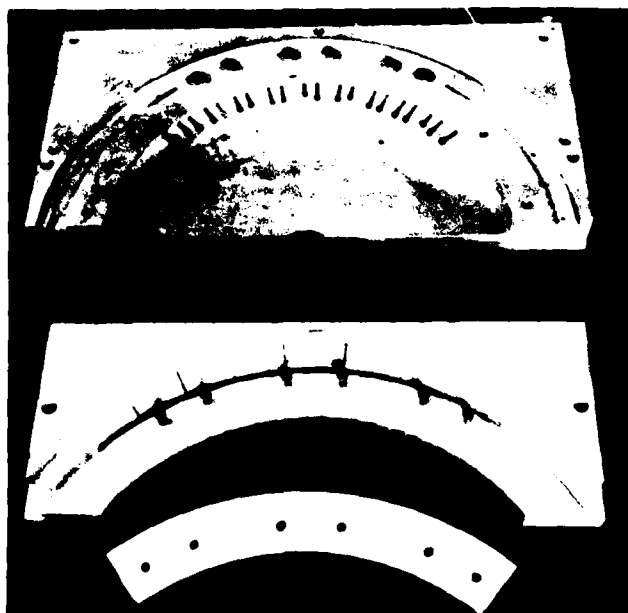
Head-plate and base-plate with auxiliary pressure blocks and clamping plates.
